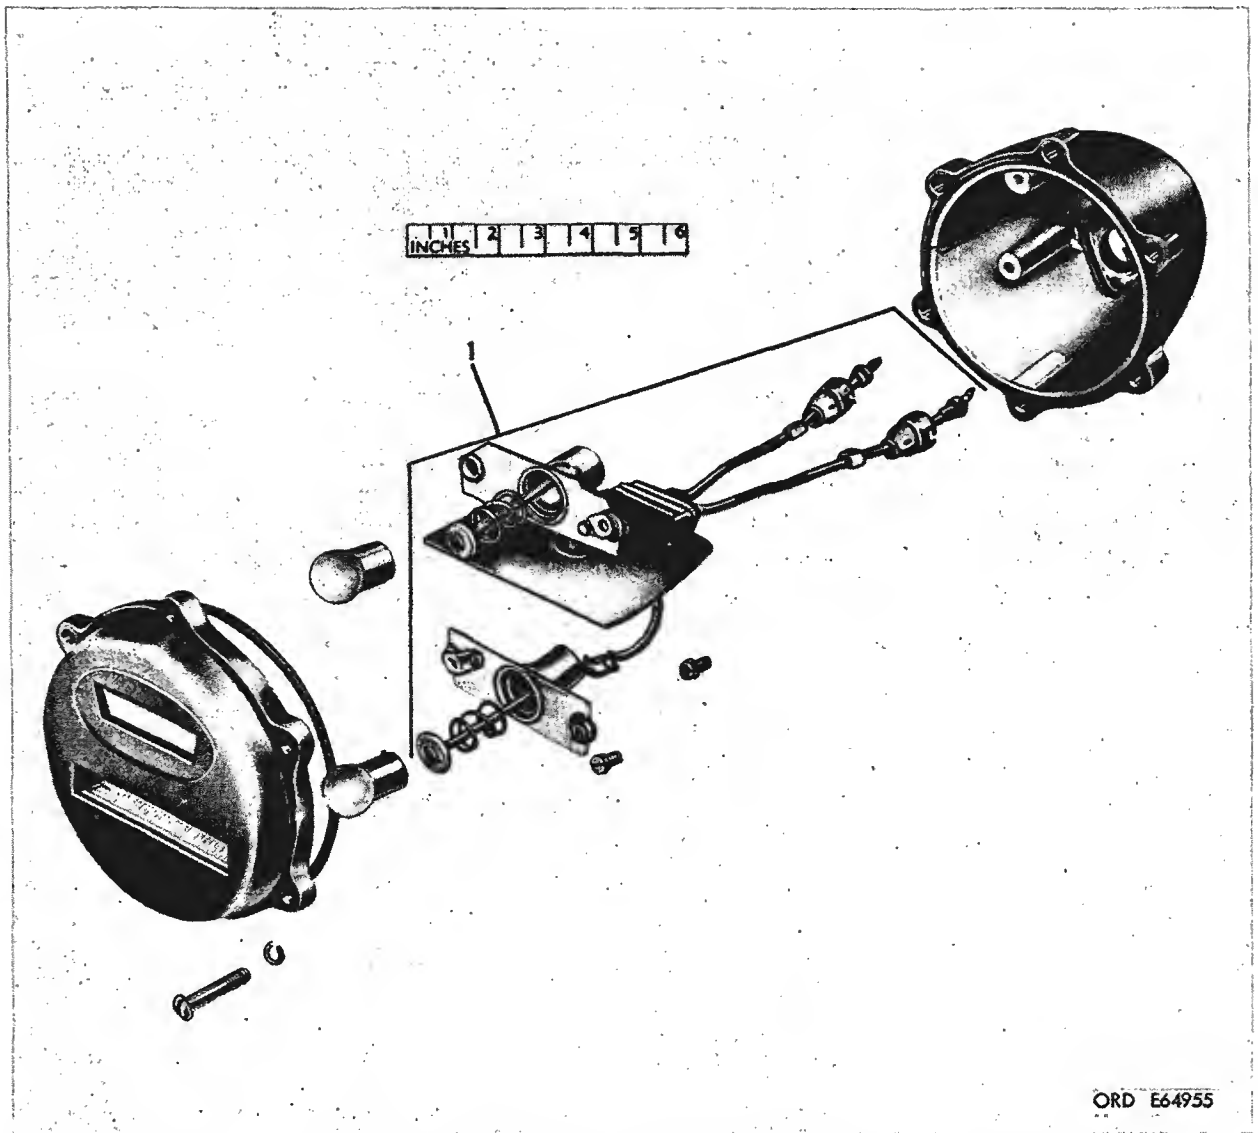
Right service, blackout tail, and stoplight assembly—exploded view.
